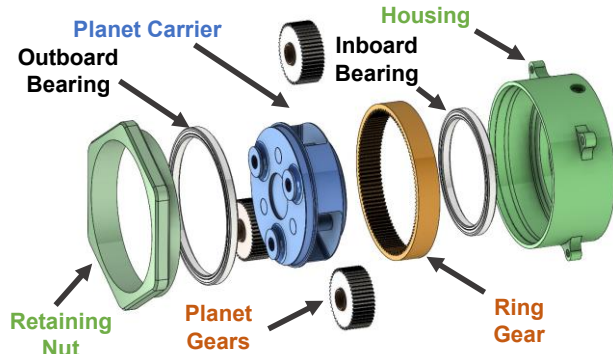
An exploded view of MIT Motorsports' MY21 gearbox design. From left to right, the retaining nut, outboard bearing, ring gear, planet carrier, ring gear, inboard bearing, and housing can be seen. These are all assembled together within the height of the housing, with the aluminum carrier as the output and a separate sun gear in the center (not shown) as the input driving the gearbox.
